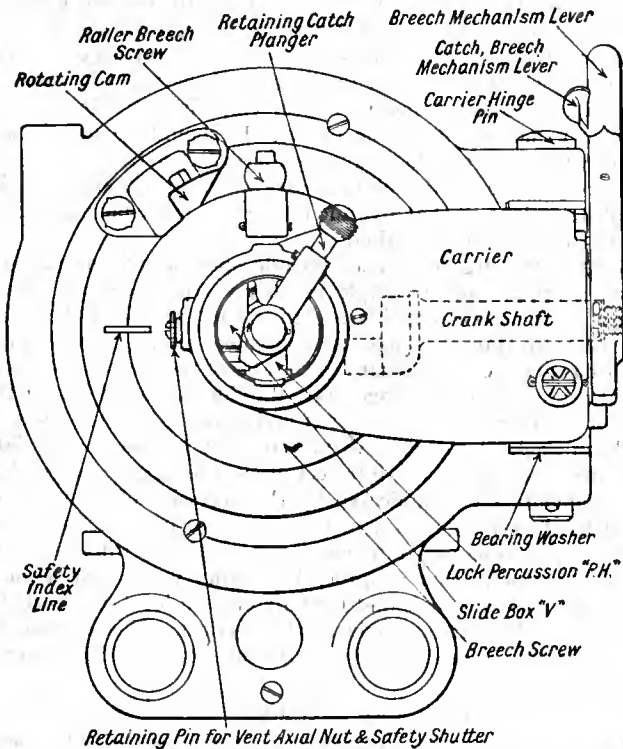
General arrangement of breech mechanism of B.L. 6-in. 26 cwt. howitzer.
